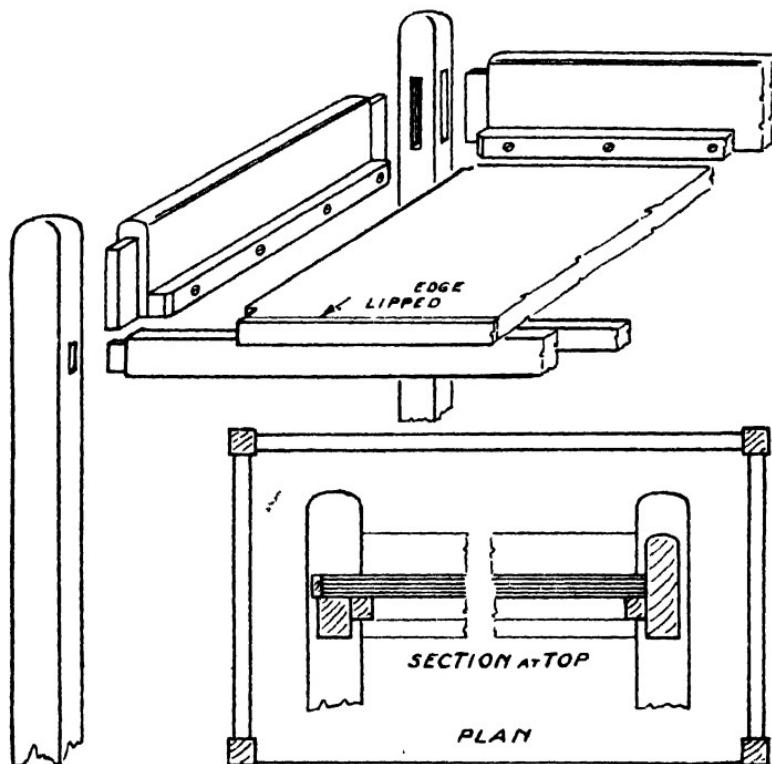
METHOD OF ASSEMBLY; ALSO PLAN AND SECTION.
